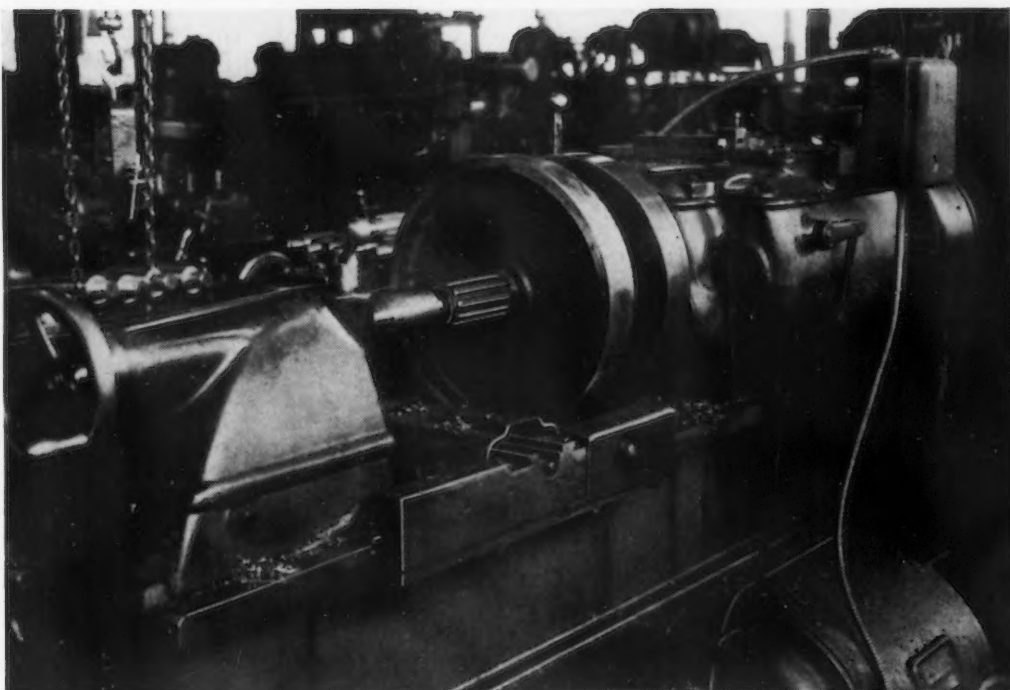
In the final manufacturing operation the 65 teeth of the gears are hobbled on this machine, equipped with a massive work-holding fixture.
